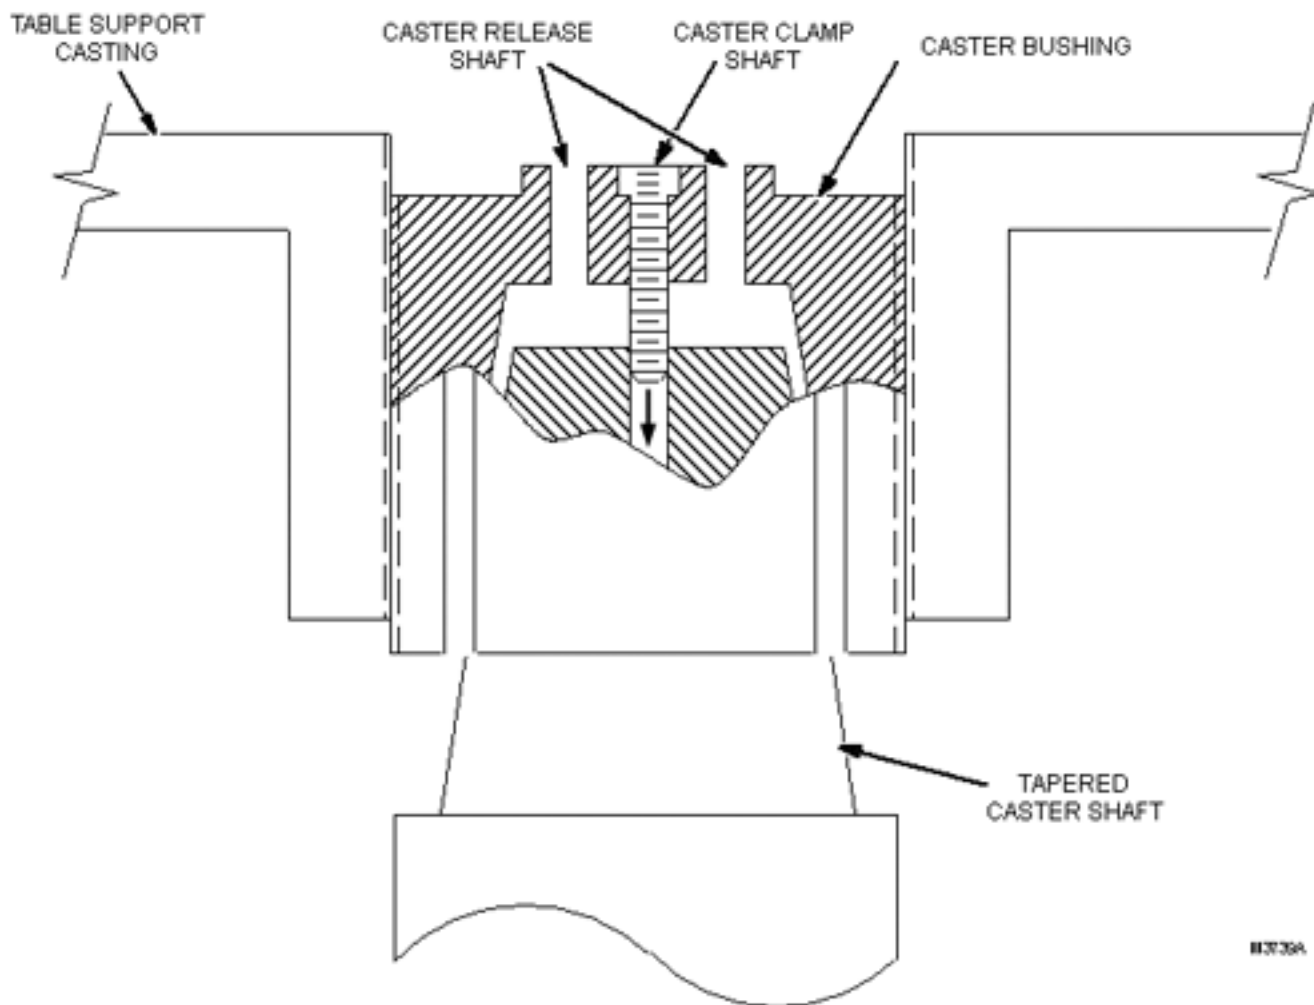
CASTER BUSHING AND TAPERED CASTER SHAFT
